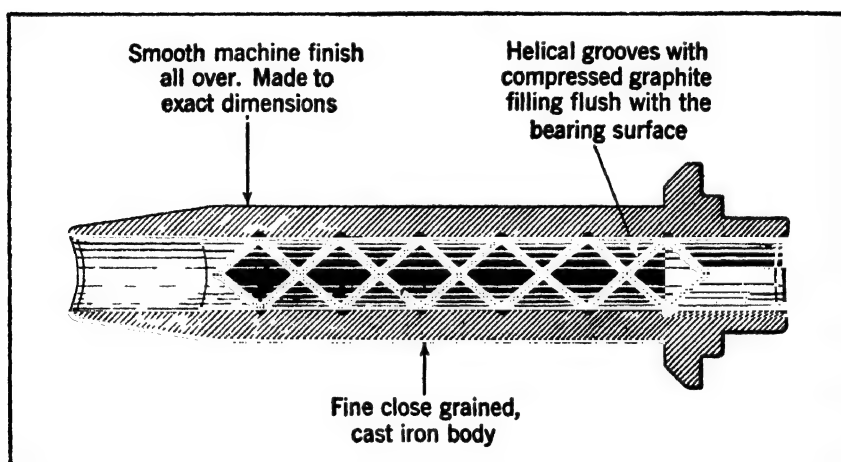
Sectional View of Randall Graphite-Filled Grooved Valve Stem Guide.
